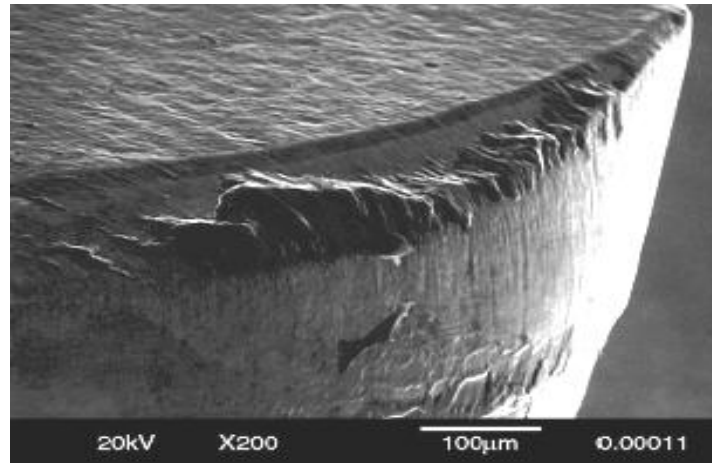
The tool edge later than 389m of cutting movement [8].
